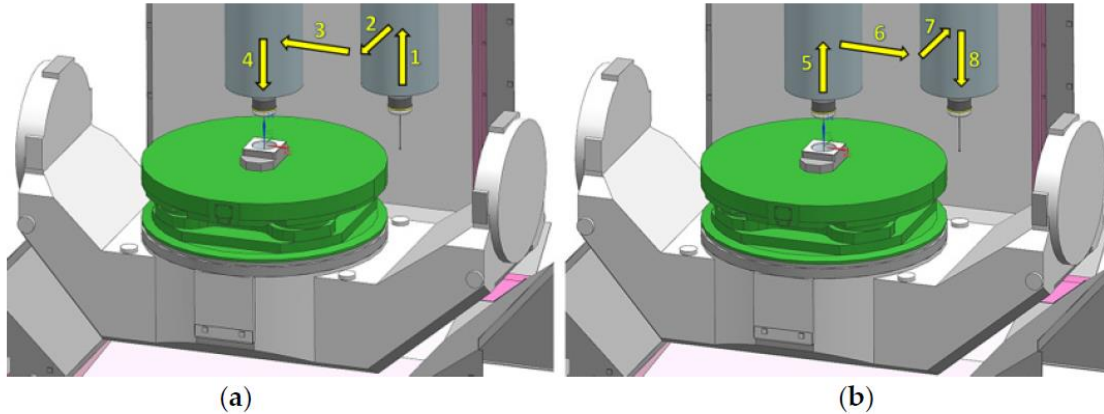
Sequence of the probe approach (a) Movement from the machining tool replacement point to the measurement area; (b) Back to the machining tool replacement point.
